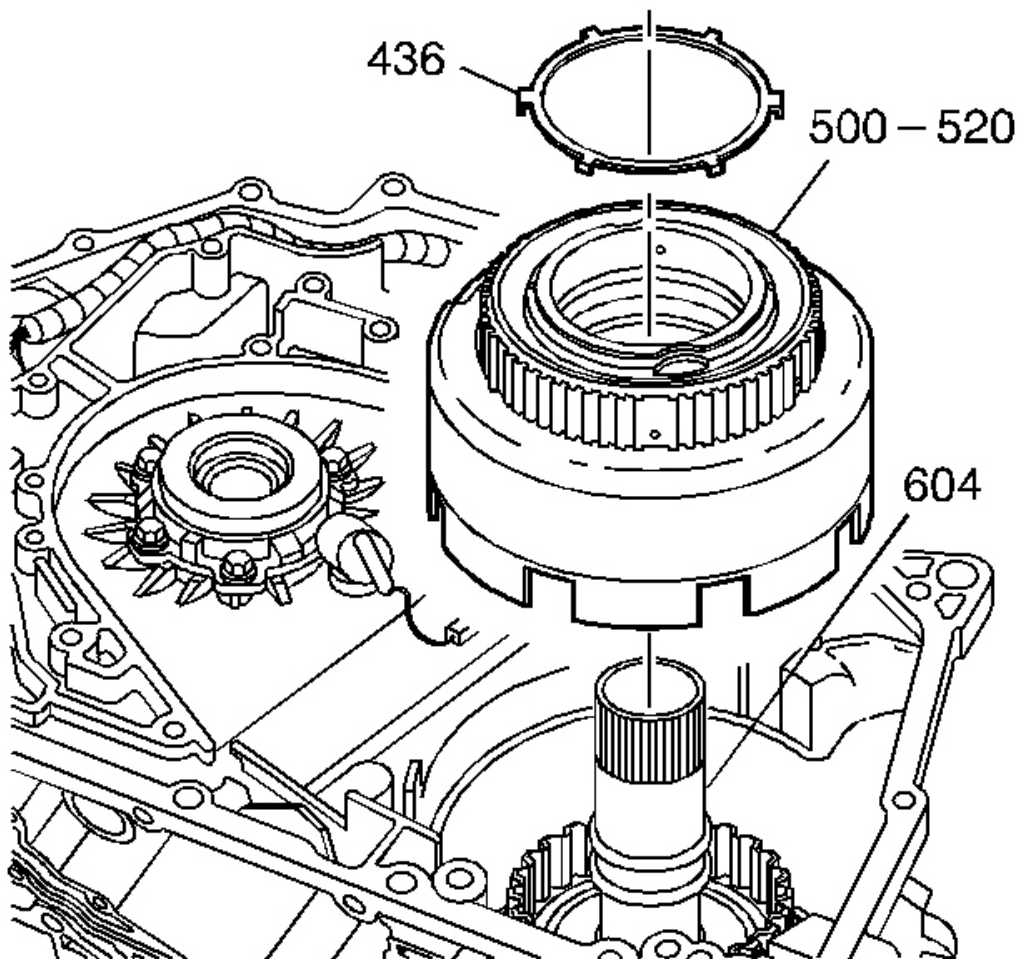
Installing Reverse Clutch Housing & Second Sprag Assembly
